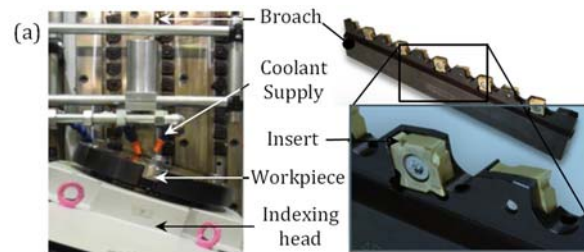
Examples of cemented carbide indexable insert broaching tool concepts [84].
